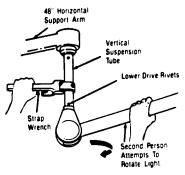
LOWER DRIVE RIVET INSPECTION.
